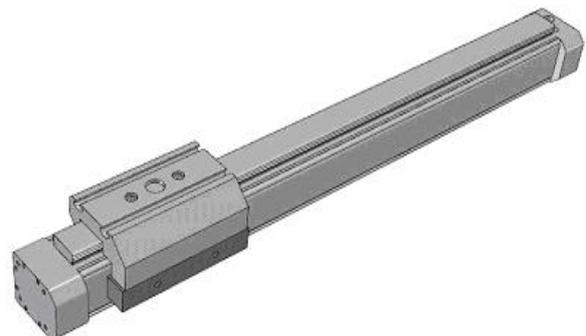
The X - axis drive (direct pneumatic driver DGPL-25-350-PPV-A-GF-B)
